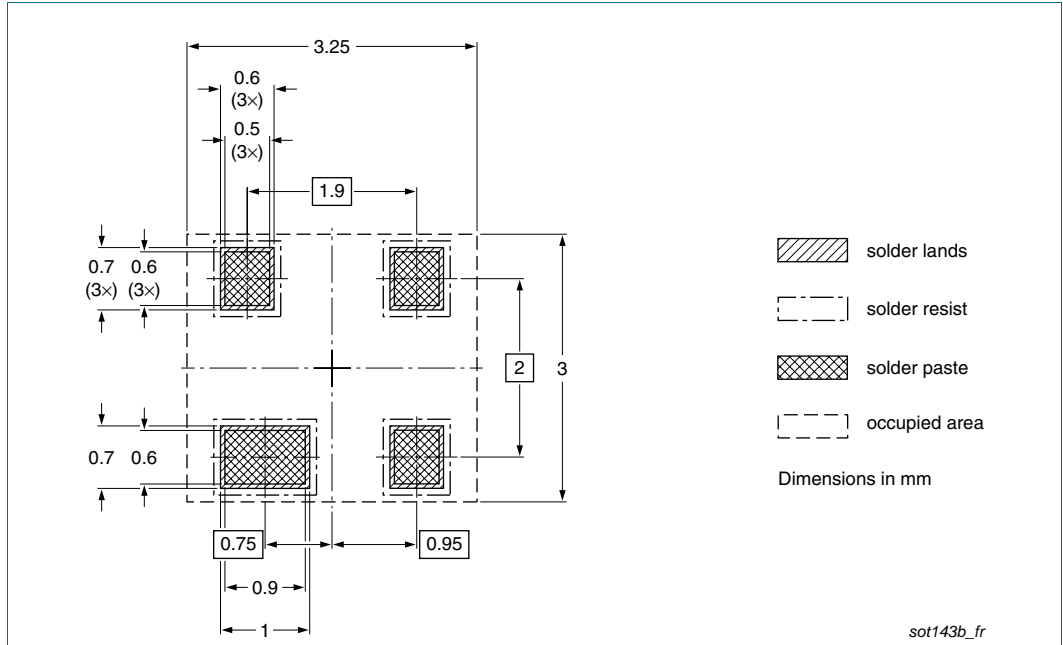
Reflow soldering footprint BAS28 (SOT143B)
